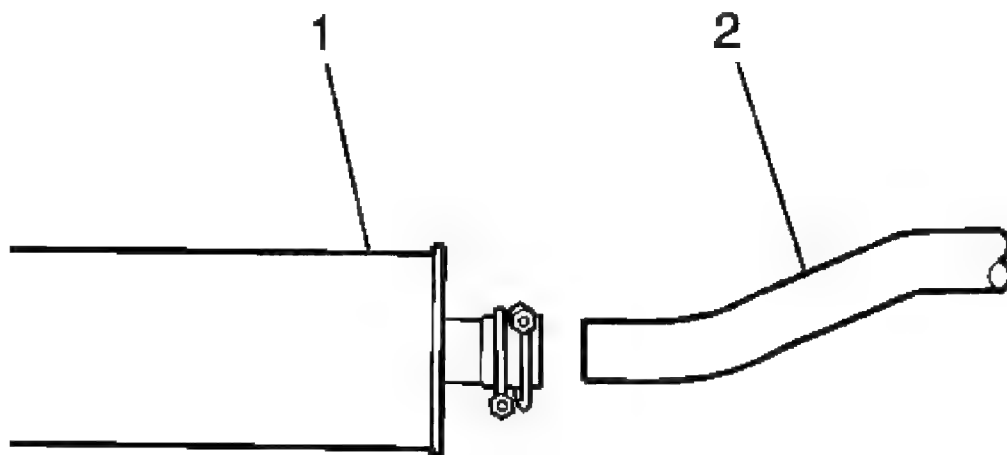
Identifying Catalytic Converter Assembly & Intermediate Pipe
